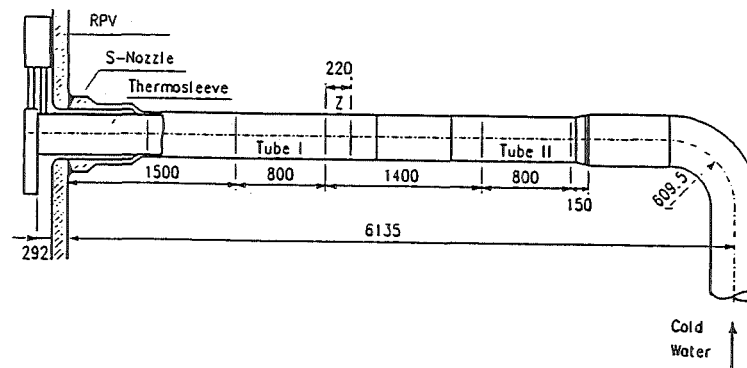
Pipe Sections With Nozzle and Thermosleeve
